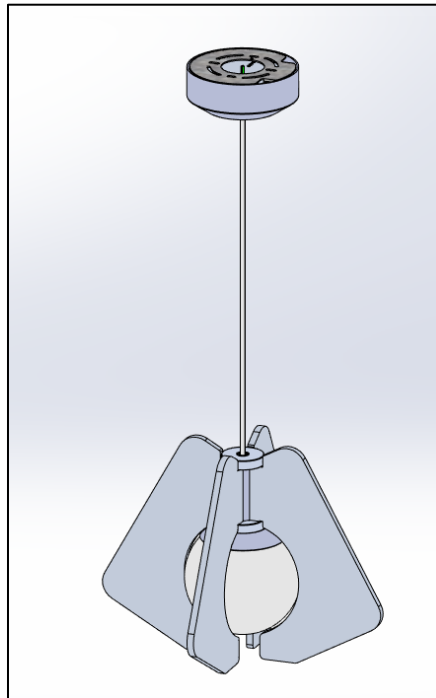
COMPLETED INSTALLATION OF ATLA PENDANT
